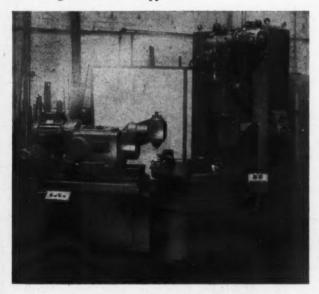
This unit-head machine is designed for milling the joint face and an oil relief slot, also reaming a 0.552/0.553-in. diameter hole in oil pump covers
